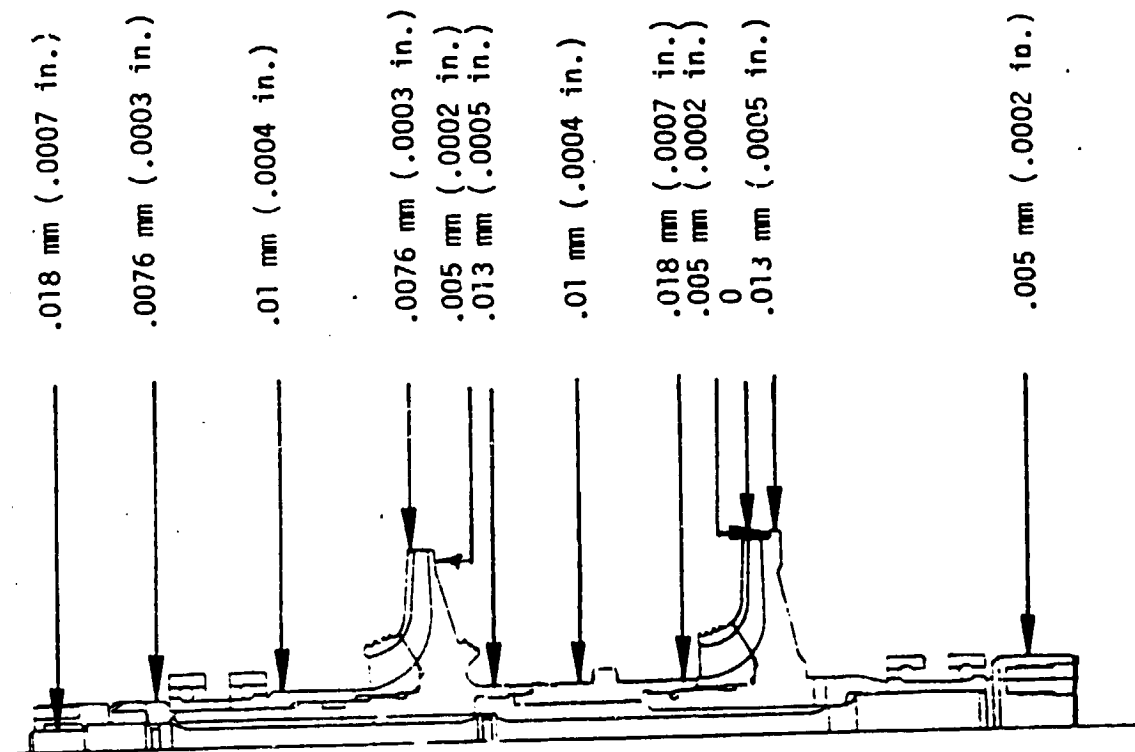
Mark 48-F Partial Balance Assembly Runouts
